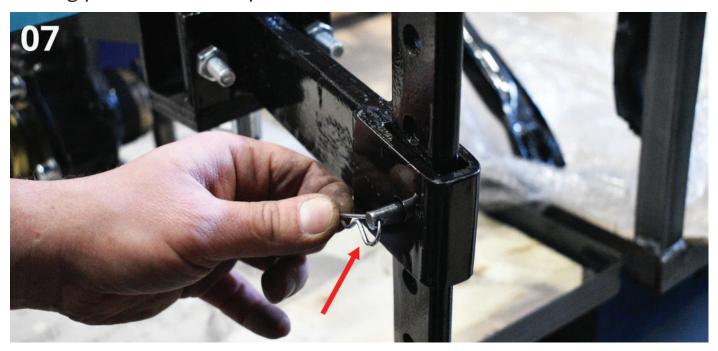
Fasten the control handle to the cultivator frame and adjust its tilt angle.
